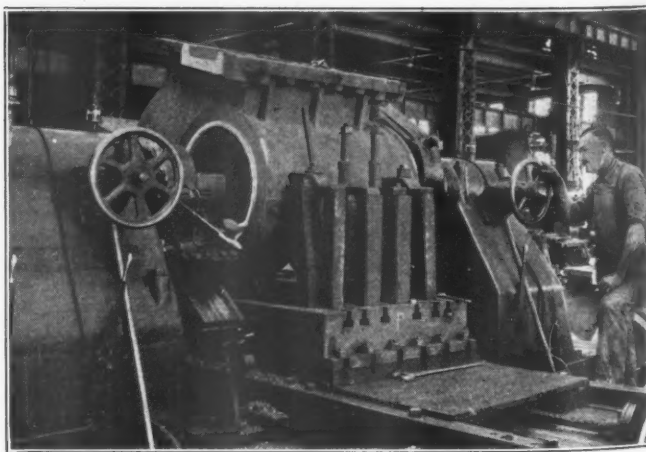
Powerful Sellers Cylinder Boring and Facing Machine
